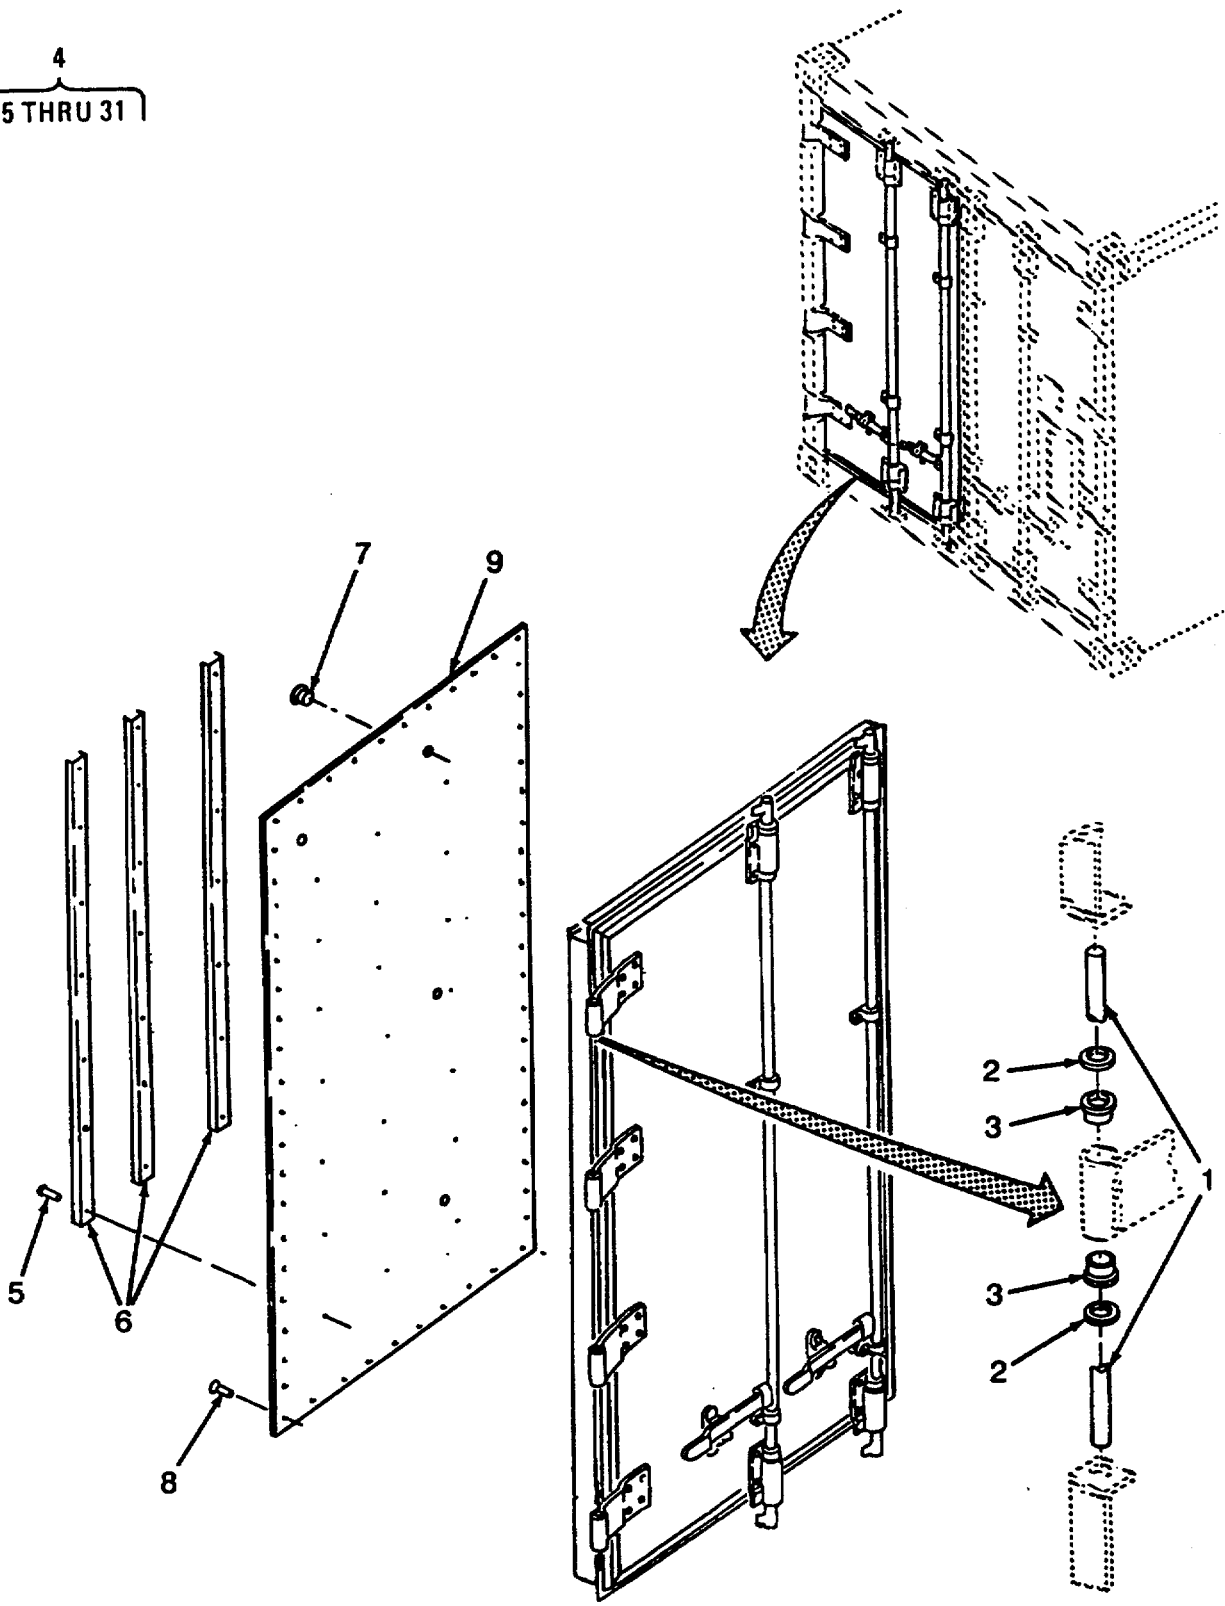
Left Hand Door Assembly (Sheet 1 of 2)
